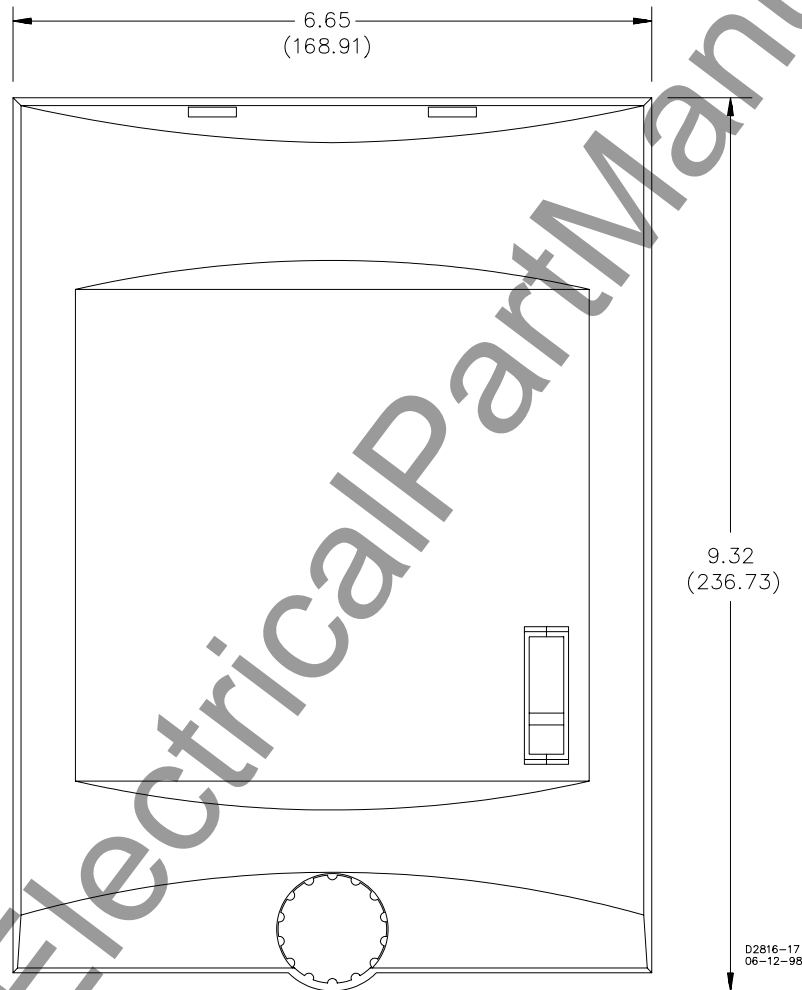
S1 Case, Outline Dimensions, Front View
